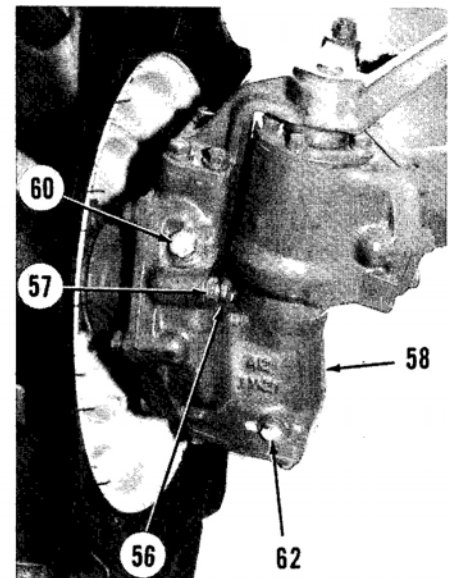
View showing fill plug (60), drain plug (62), steering angle adjuster screw (56) and locknut (57) located in outer drive housing (58) on Model B7100HST-D.
